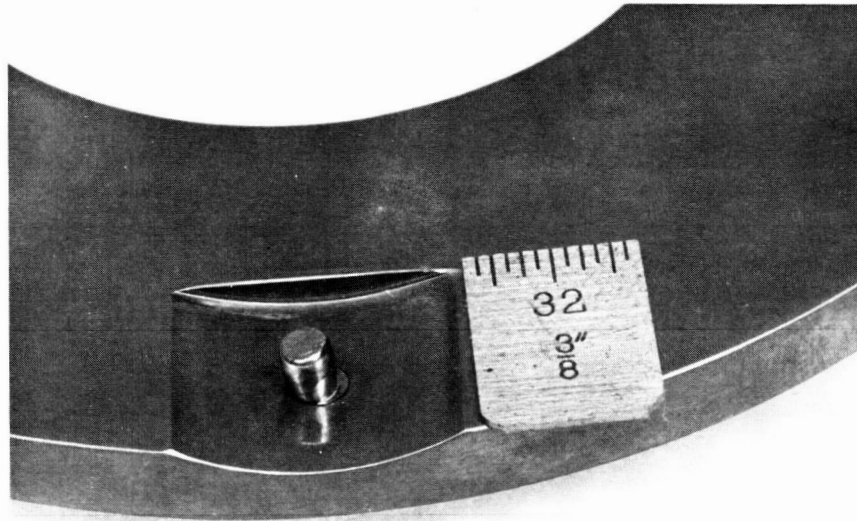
Motor end thrust bearing gimbal ring with partially sheared and bent pin.
